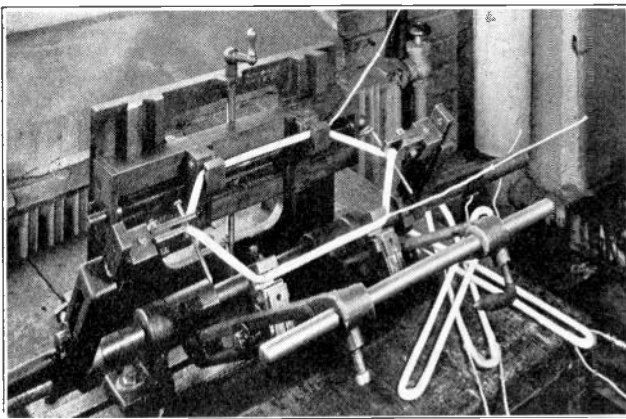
This photo shows a coil shaping machine, which is used for pulling diamond coils in to the proper shape and putting the twist in the ends as shown. This machine is adjustable to shape coils of different sizes
